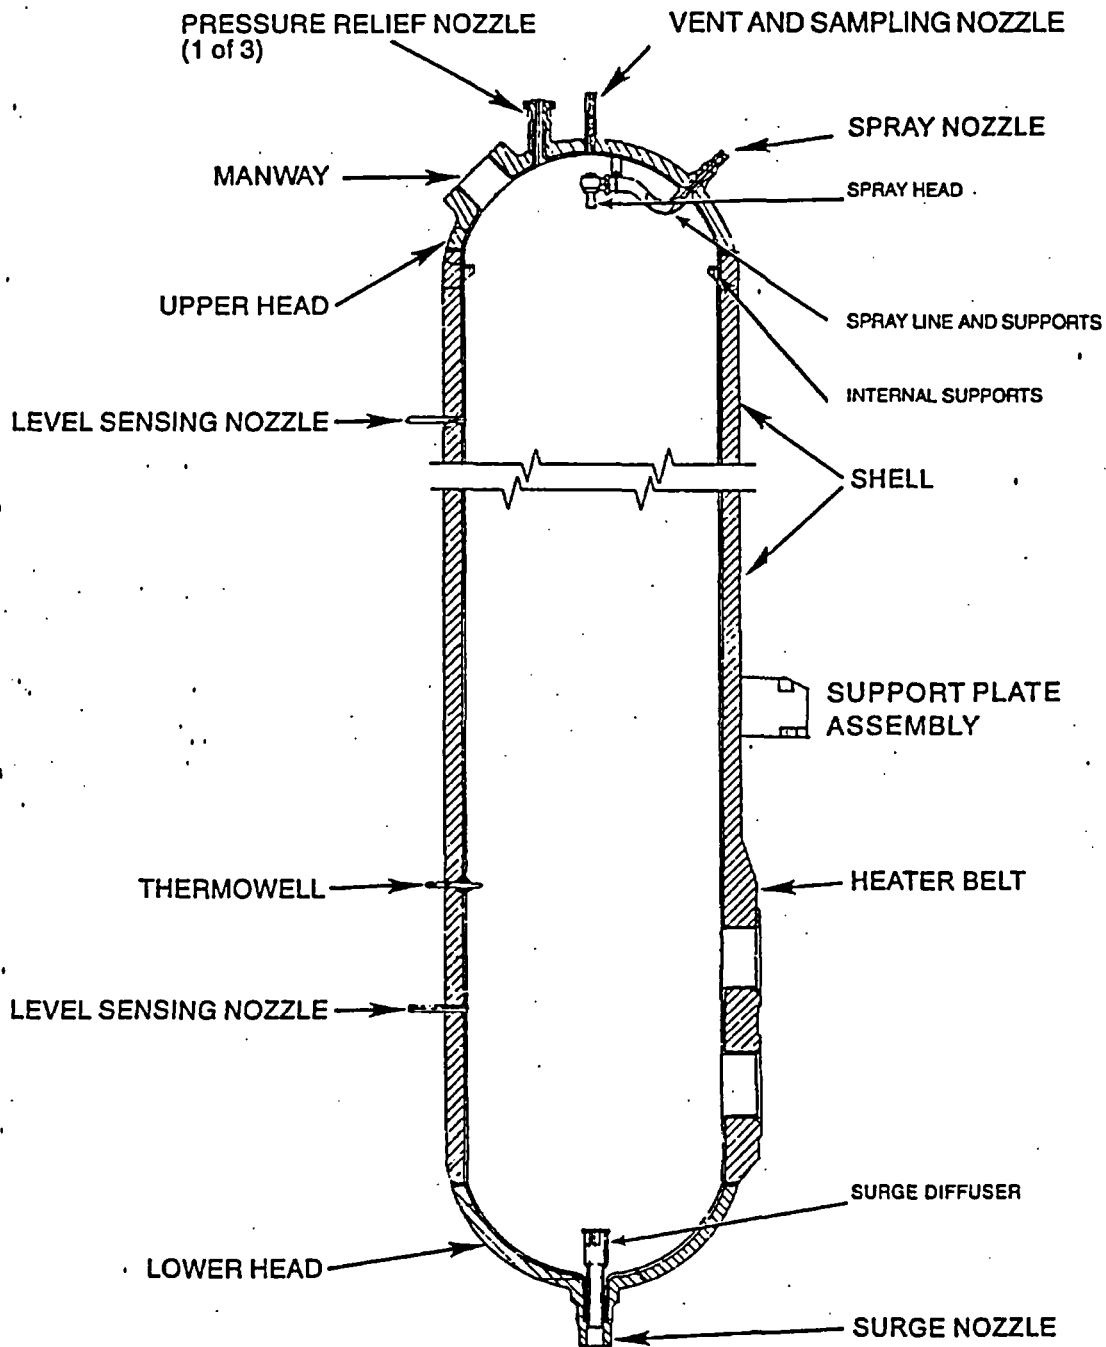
The general arrangement of pressurizer penetrations at B&W 177-FA units. TMI, Unit 1 also has 36 internal stainless steel ladder rungs welded to the I.D. surface of the pressurizer vessel.
